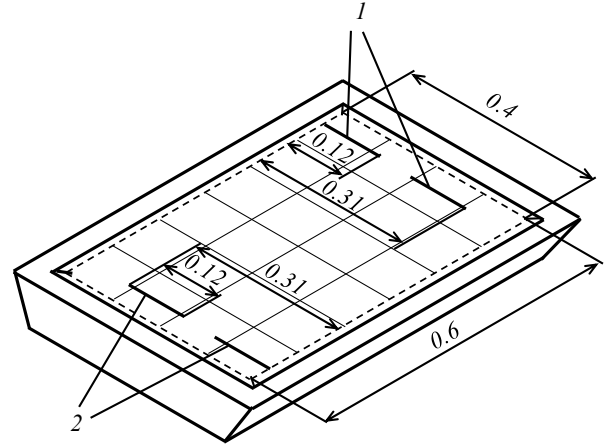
The geometrical dimensions of the mold and the layout of the blades of the two-armed manipulation robot for removing the oxide film from the surface of the melt:
